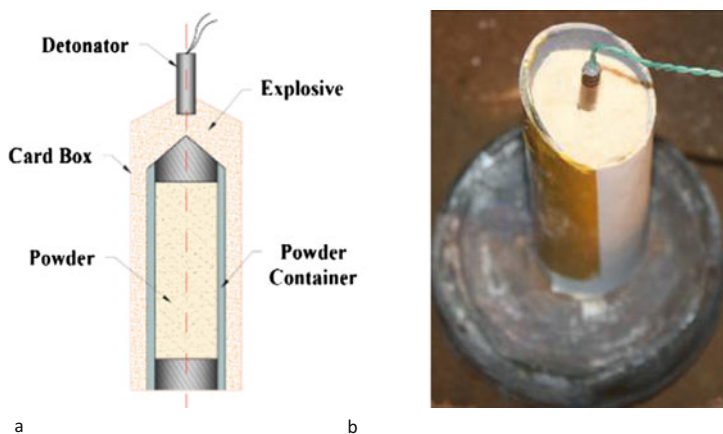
Scheme of explosive compaction setups: a schematic view of assembly for fabrication of bulk rod; b general view of assembly
